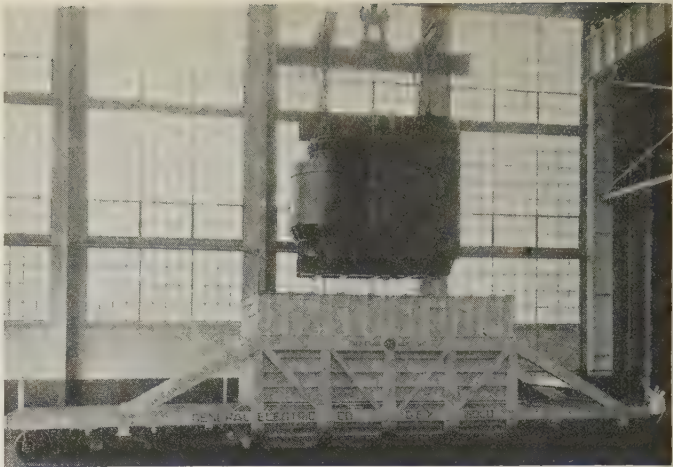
Assembled core and coils of 55,000 kva transformer being loaded into special tank car, which will be filled with nitrogen gas for shipment
